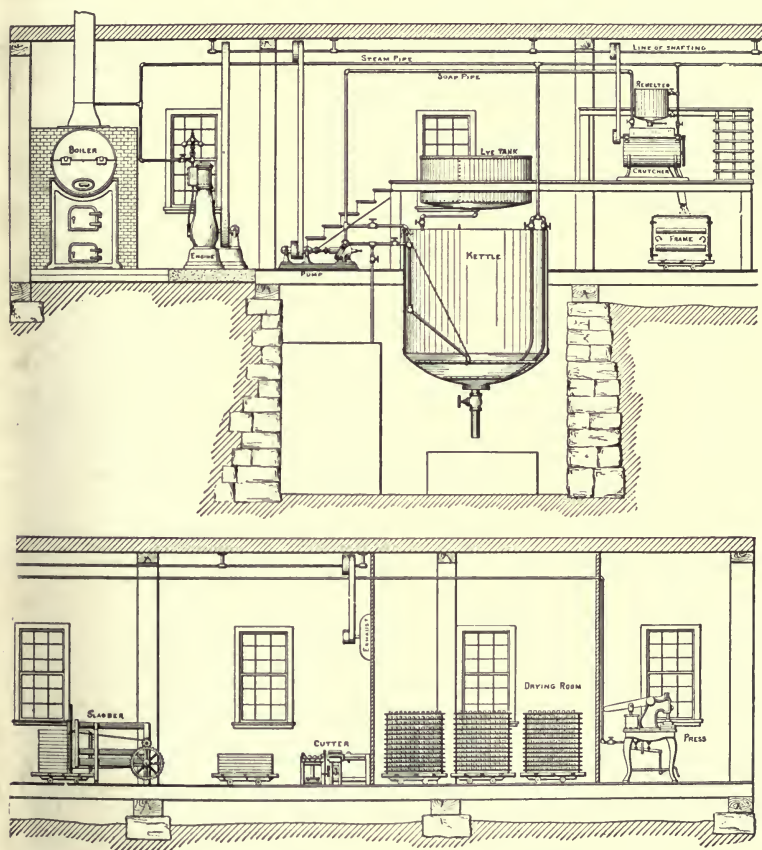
Conventional View of Soap Manufactory Showing Essential Equipment and Course (Left to Right) of Procedure.
